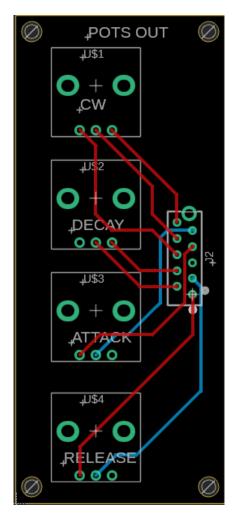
ADSR Potentiometers PCB Board
